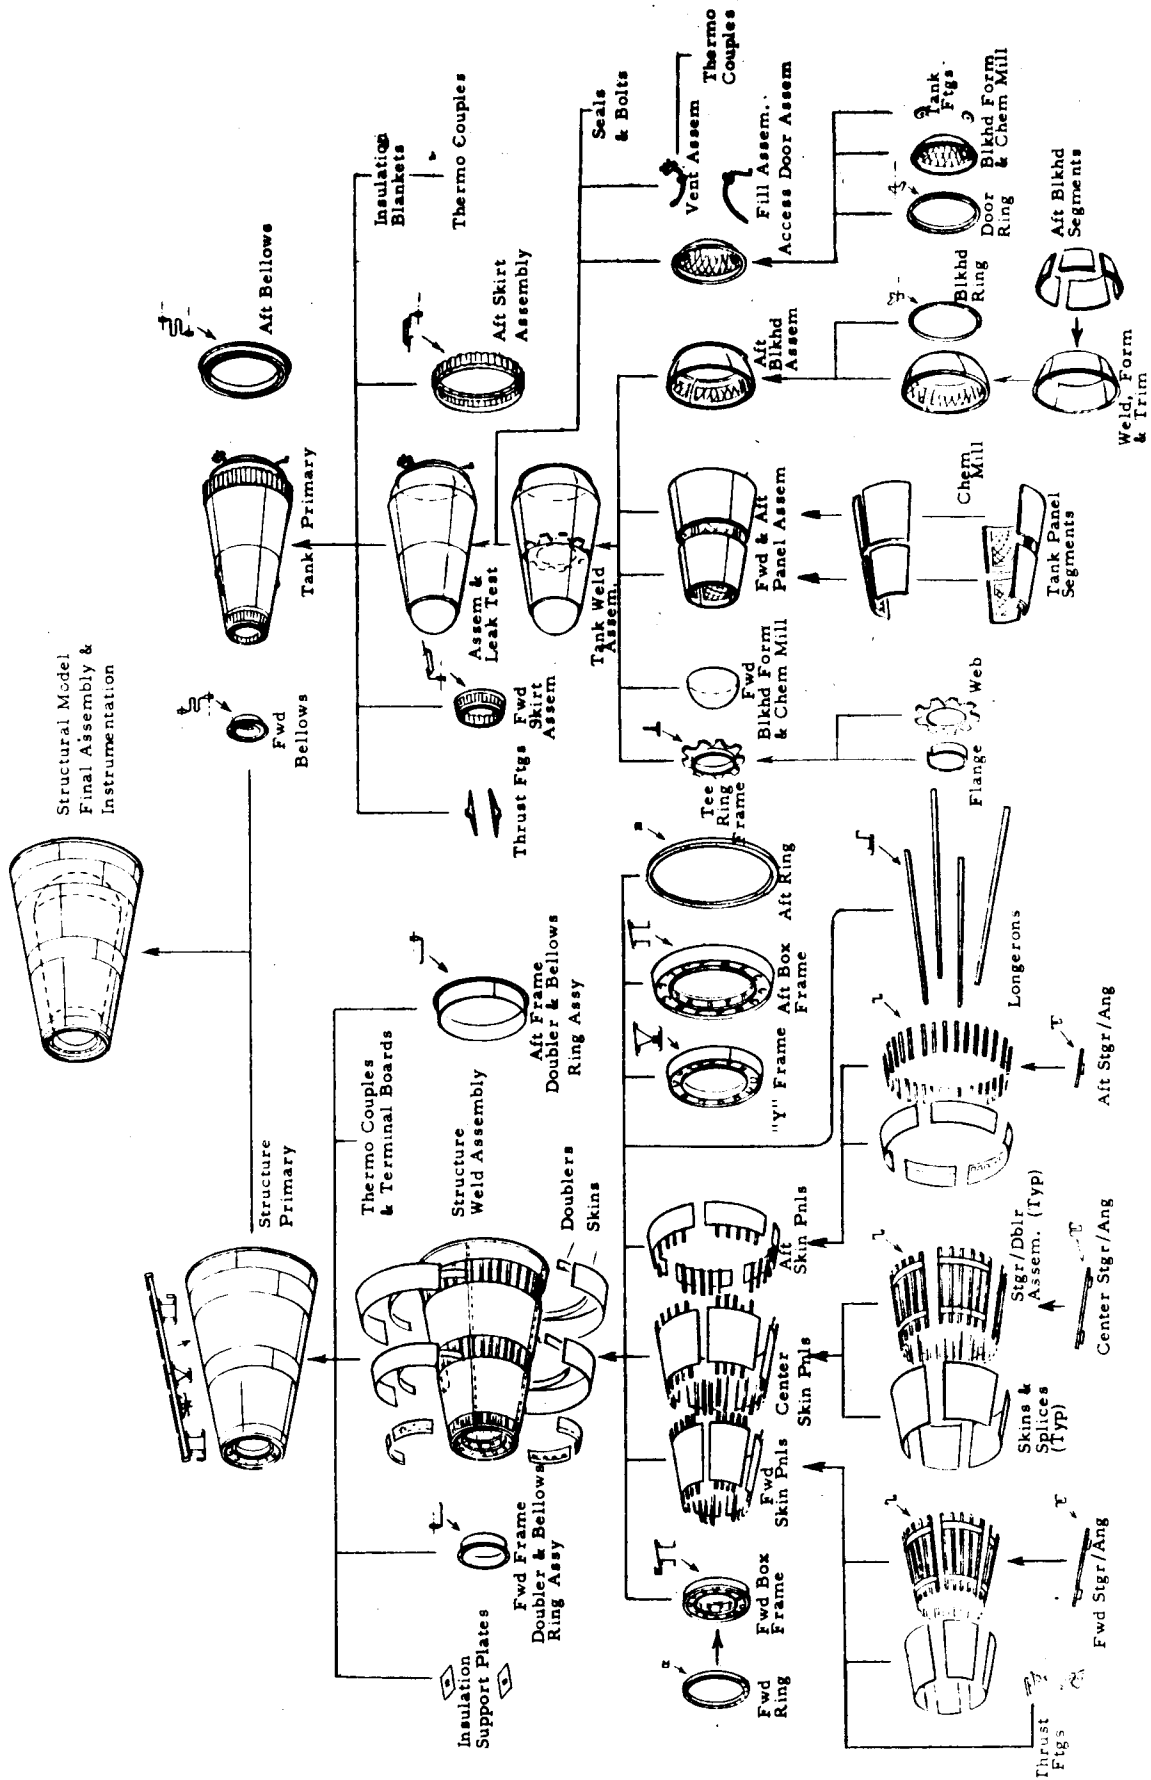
Manufacturing Breakdown and Assembly Sequence
